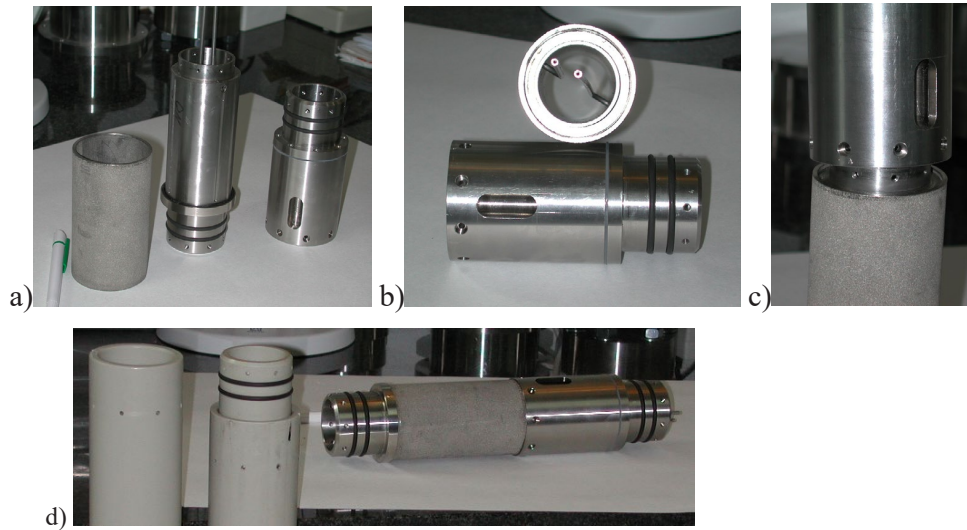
Fluid sampling assembly of elements: a) parts, b) detail, c) insertion, d) element and rods
